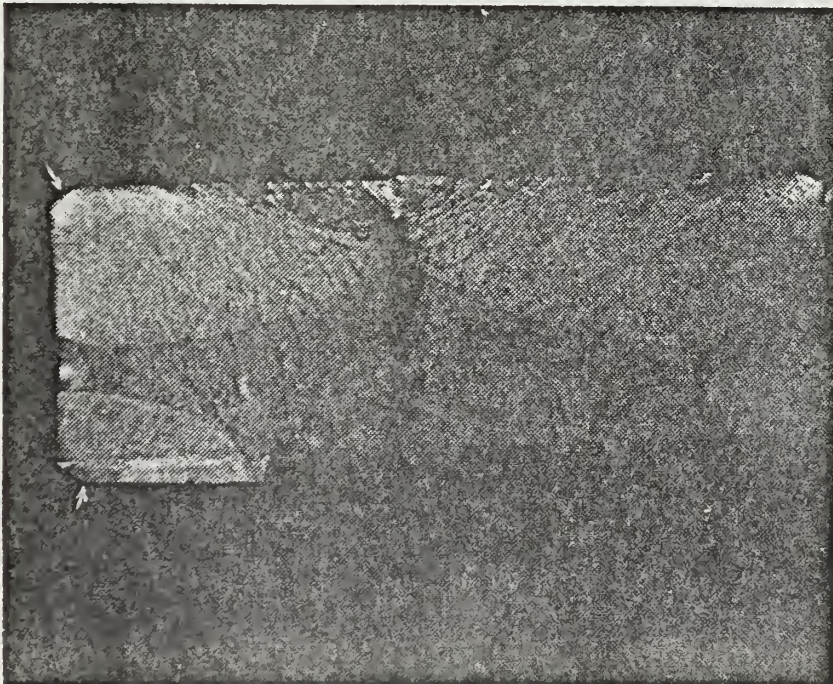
Macro-fractograph of a specimen RI-2-5, fractured after 20,500 cycles at 100 ksi, showing several crack initiation sites (arrows) and several fatigue zones. X10.
